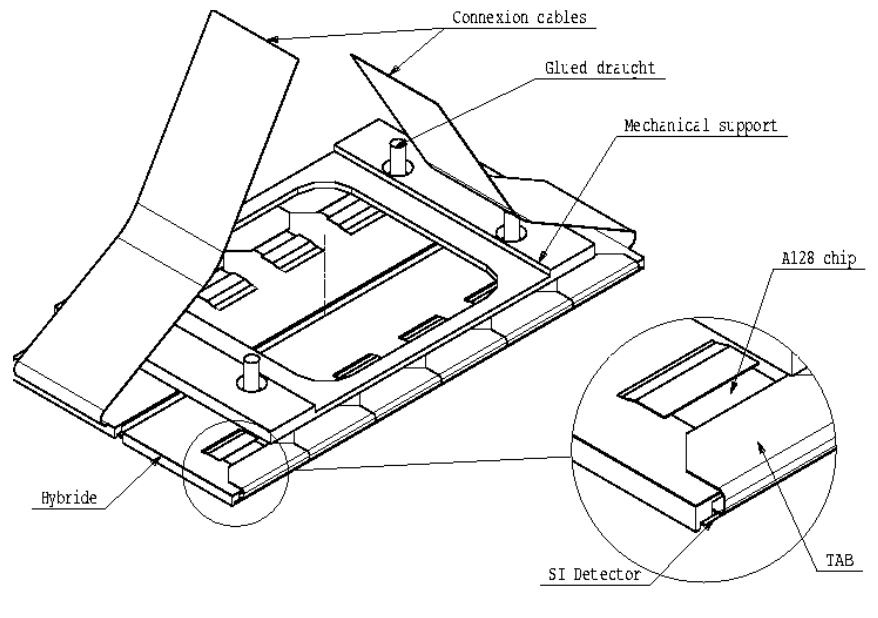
3D view of a SSD module prototype based on two single-sided hybrids and TAB tape.
